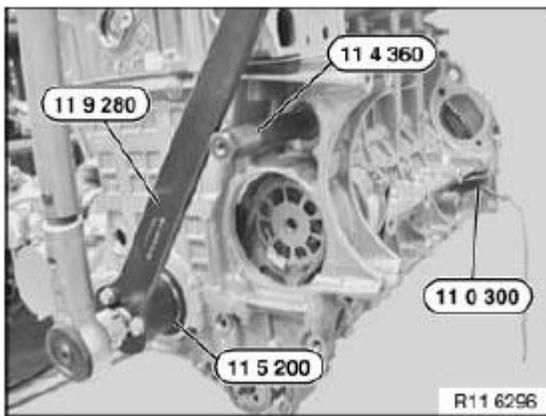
Identifying Special Tool (11 9 280, 11 4 360, 11 5 200 And 11 0 300)
